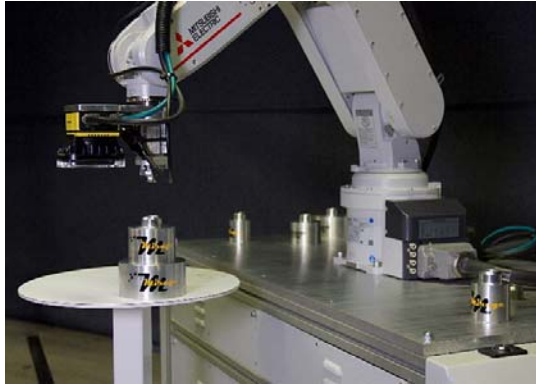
The AGV-mounted robot can move along a production line and perform jobs such as product assembly, pick-and-place or packaging tasks.
